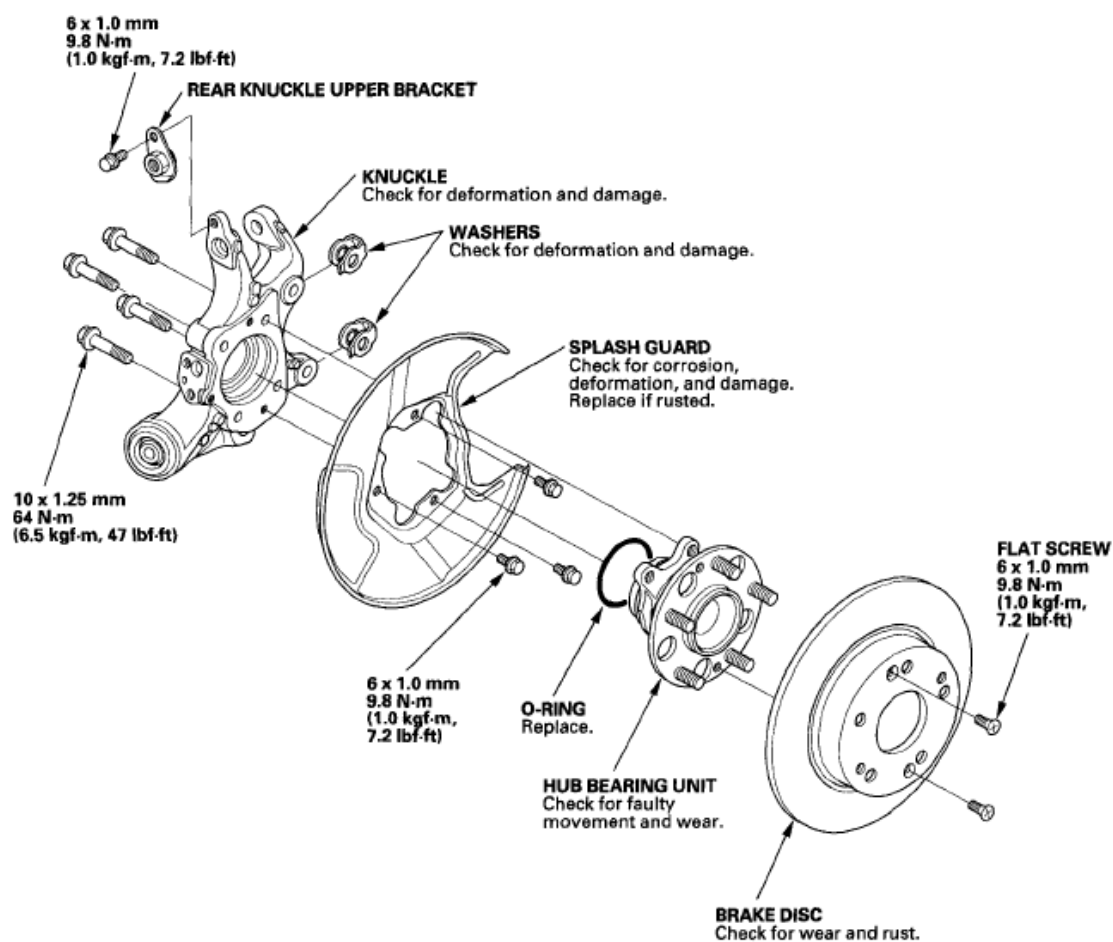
Exploded View Of Disc Brake Type (With Torque Specifications)
